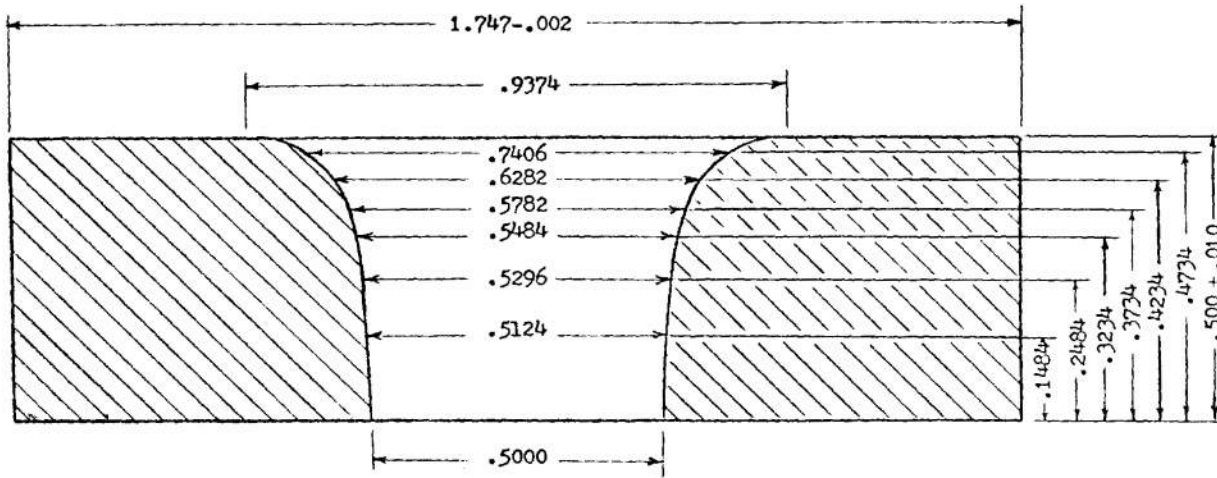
Final Design of 0.50-inch Erosion Test Vent.
